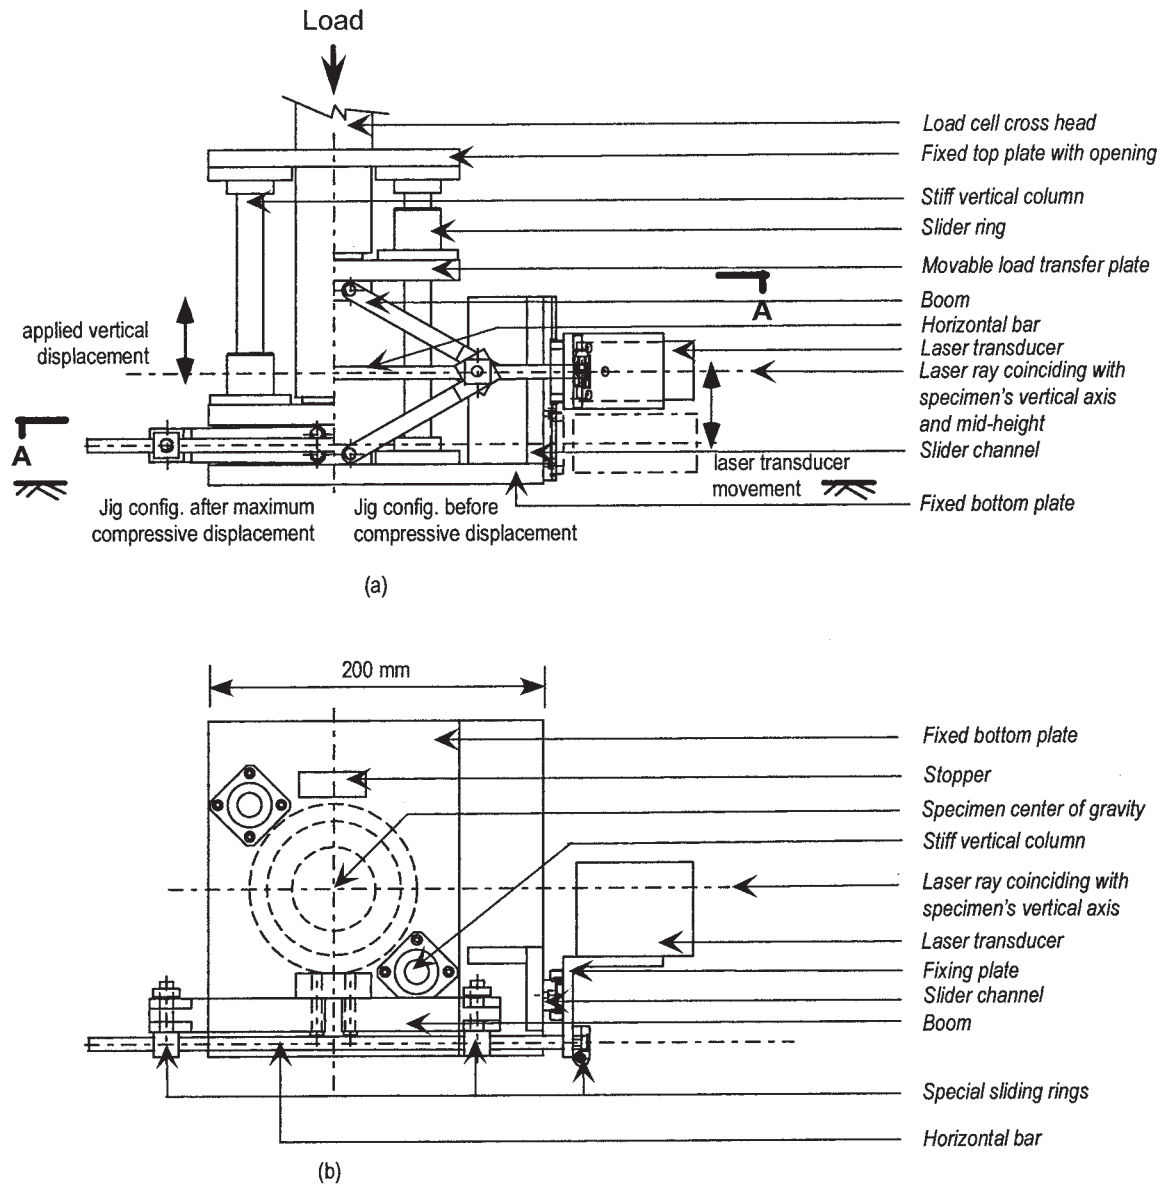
Details of mechanical device for synchronized laser transducer movement. (a) Elevation; (b) Plan view at Section A-A.
